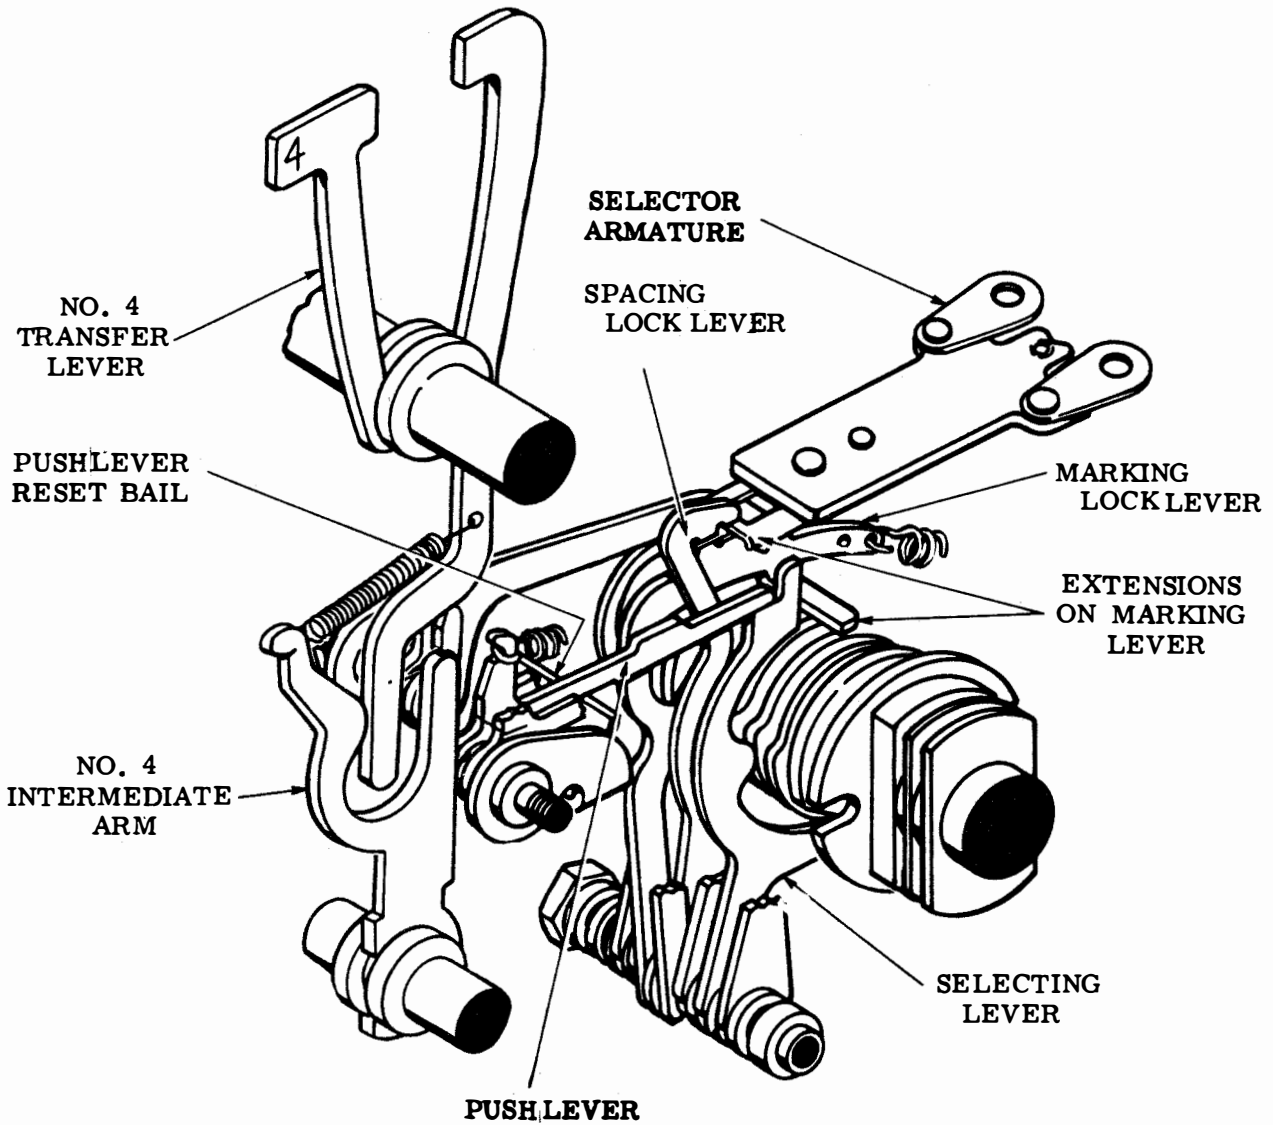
Selecting Mechanism and Transfer Mechanism, Right Front View
